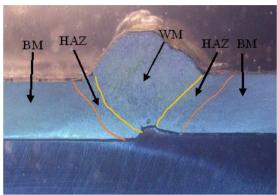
Macrostructure of a weld showing the marked regions: BM (Base Metal), HAZ (Heat-Affected Zone), and WM (Weld Metal)
